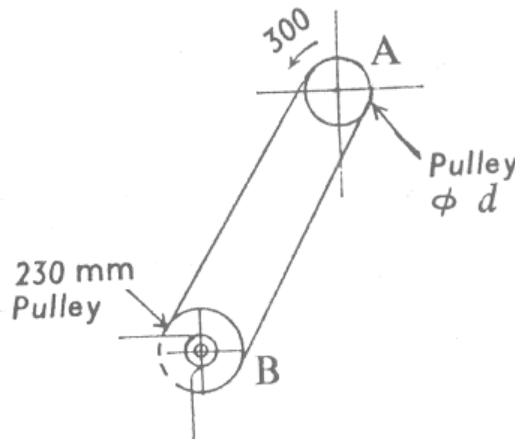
Flat belt on Machine and mainshaft pulleys
